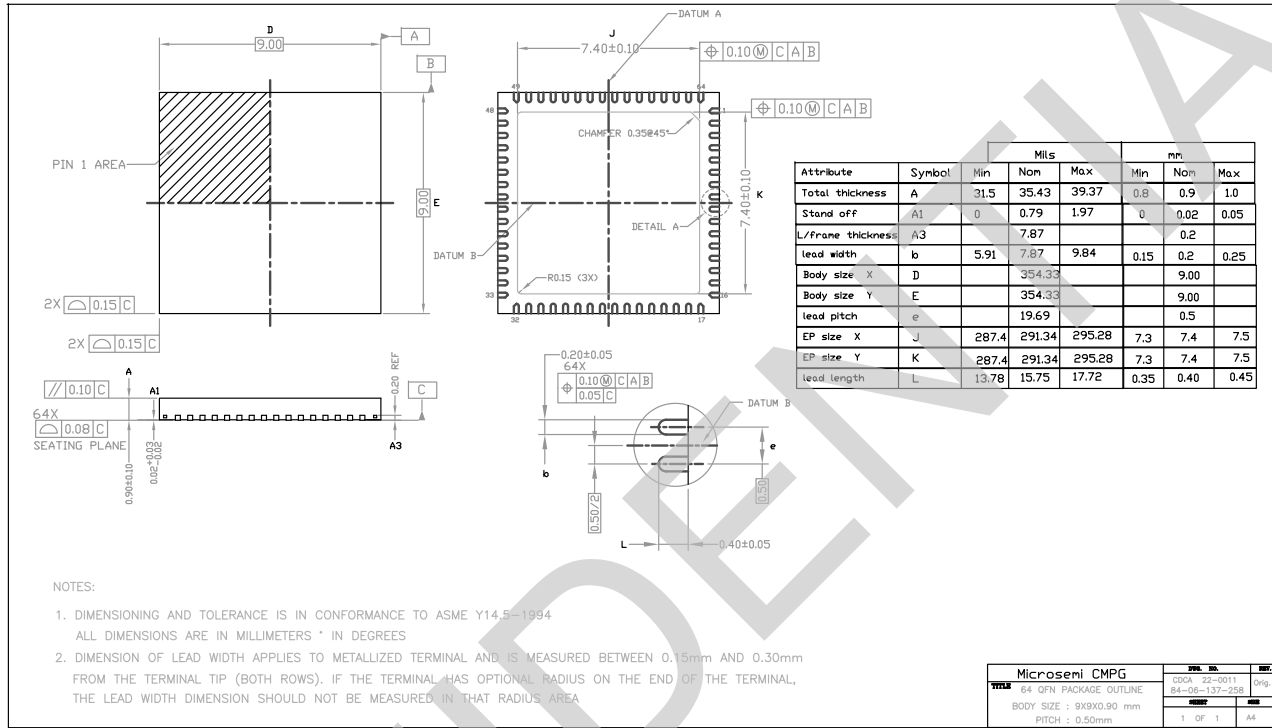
ZL88701/702 (QFN-64) Package Drawing
